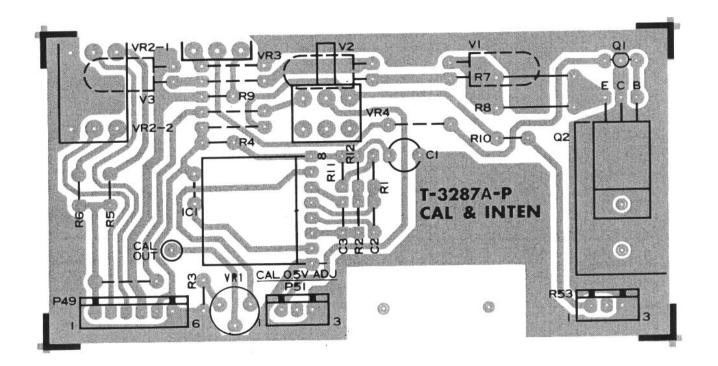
LBO-516 Calibrator and Intensity P.C. Board T-3287A
